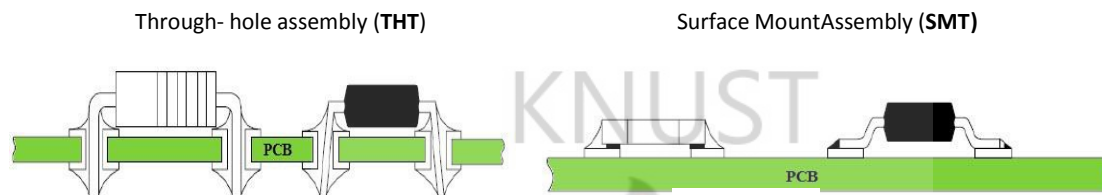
Surface Mount and Through-hole Assembly Techniques (Bernhard Wunderle, 2003).
